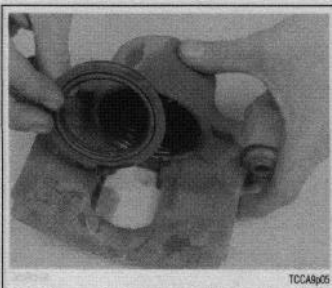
then remove the boot from the caliper housing, taking care not to score or damage the bore
